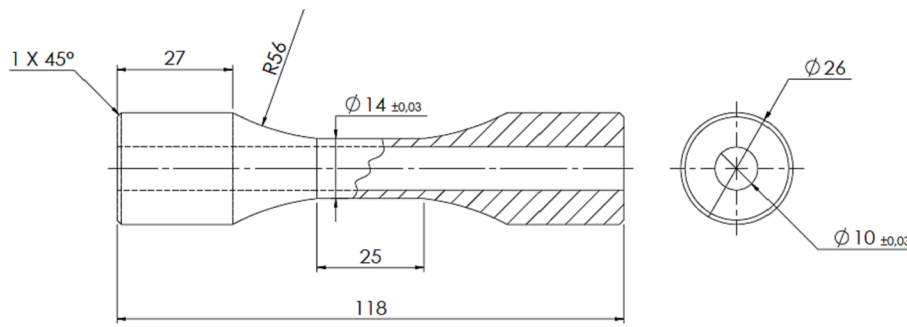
Schematic of dog-bone shaped hollow specimens. The dimensions are given in mm.
